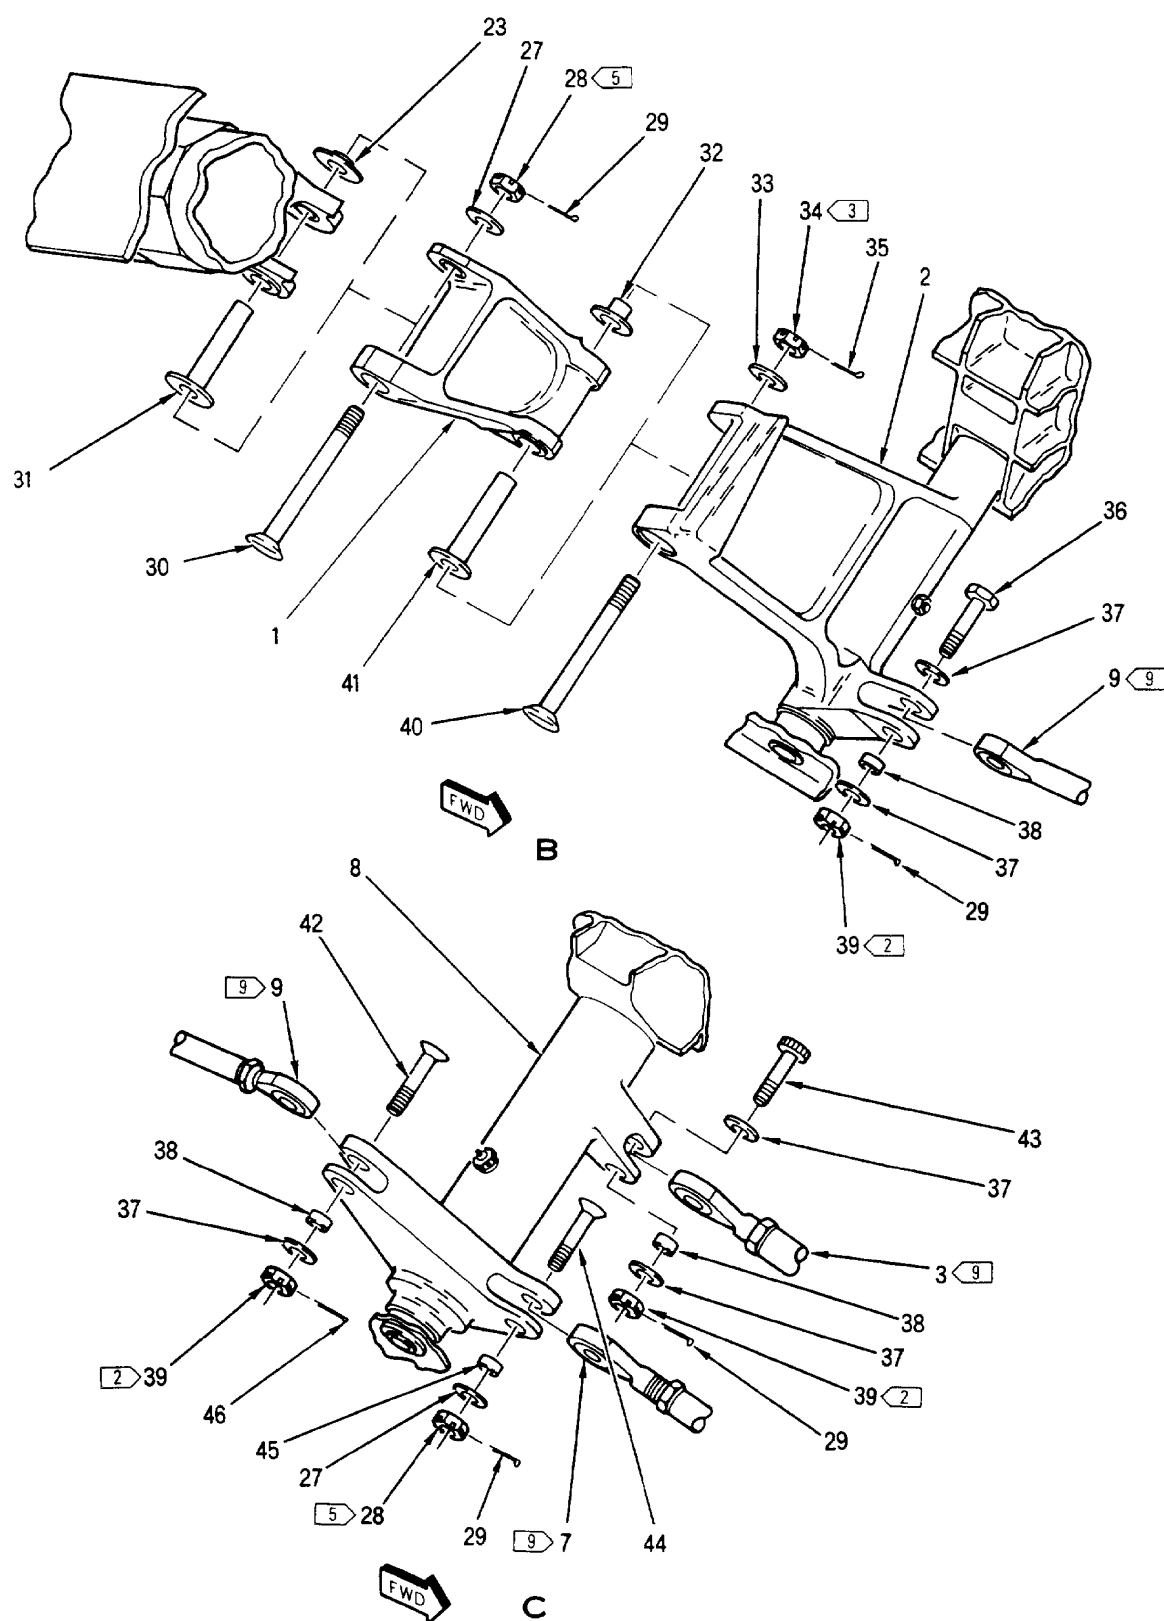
Inflight Refueling Probe and Door Drive Mechanism (Sheet 5)
